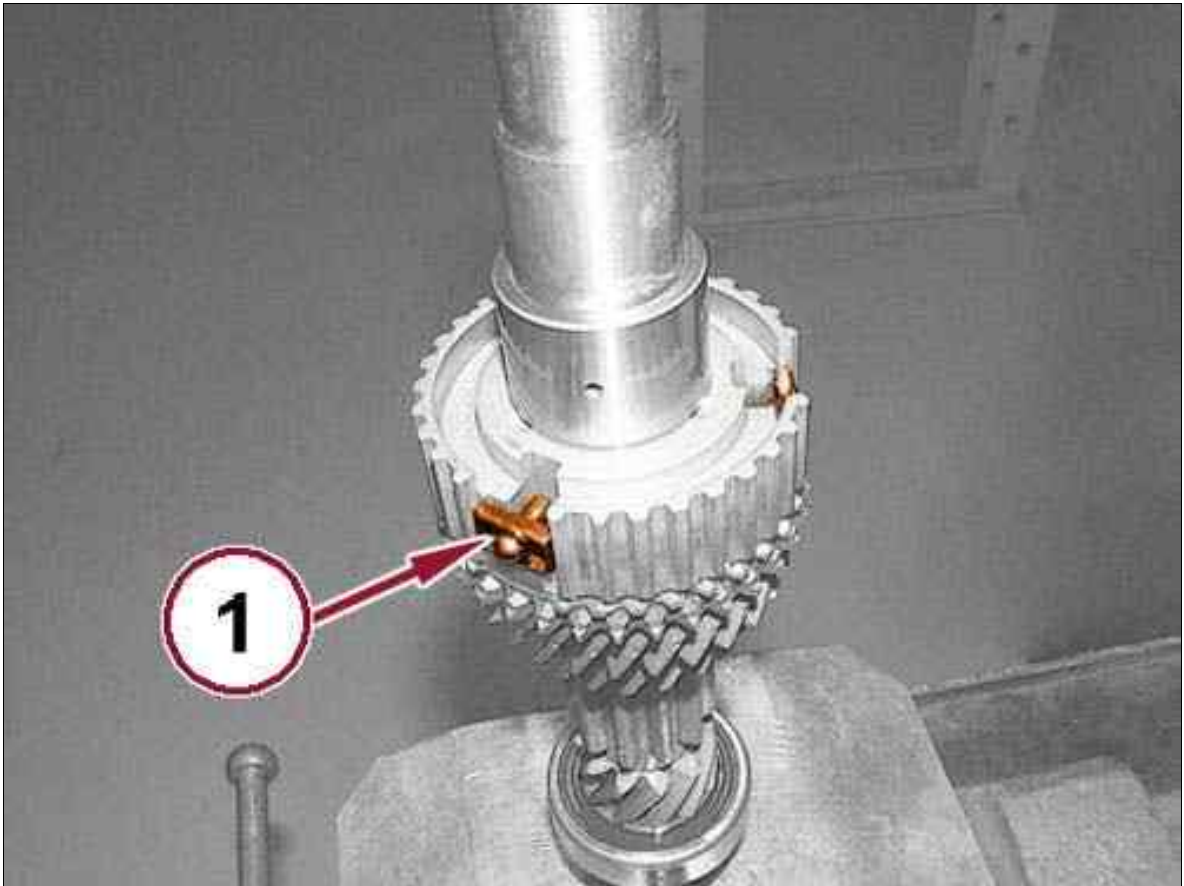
4th Gear Drive Gear Needle Bearing, 4th Gear Synchronizer Ring & 3rd And 4th Gear Synchronizer Sleeve
